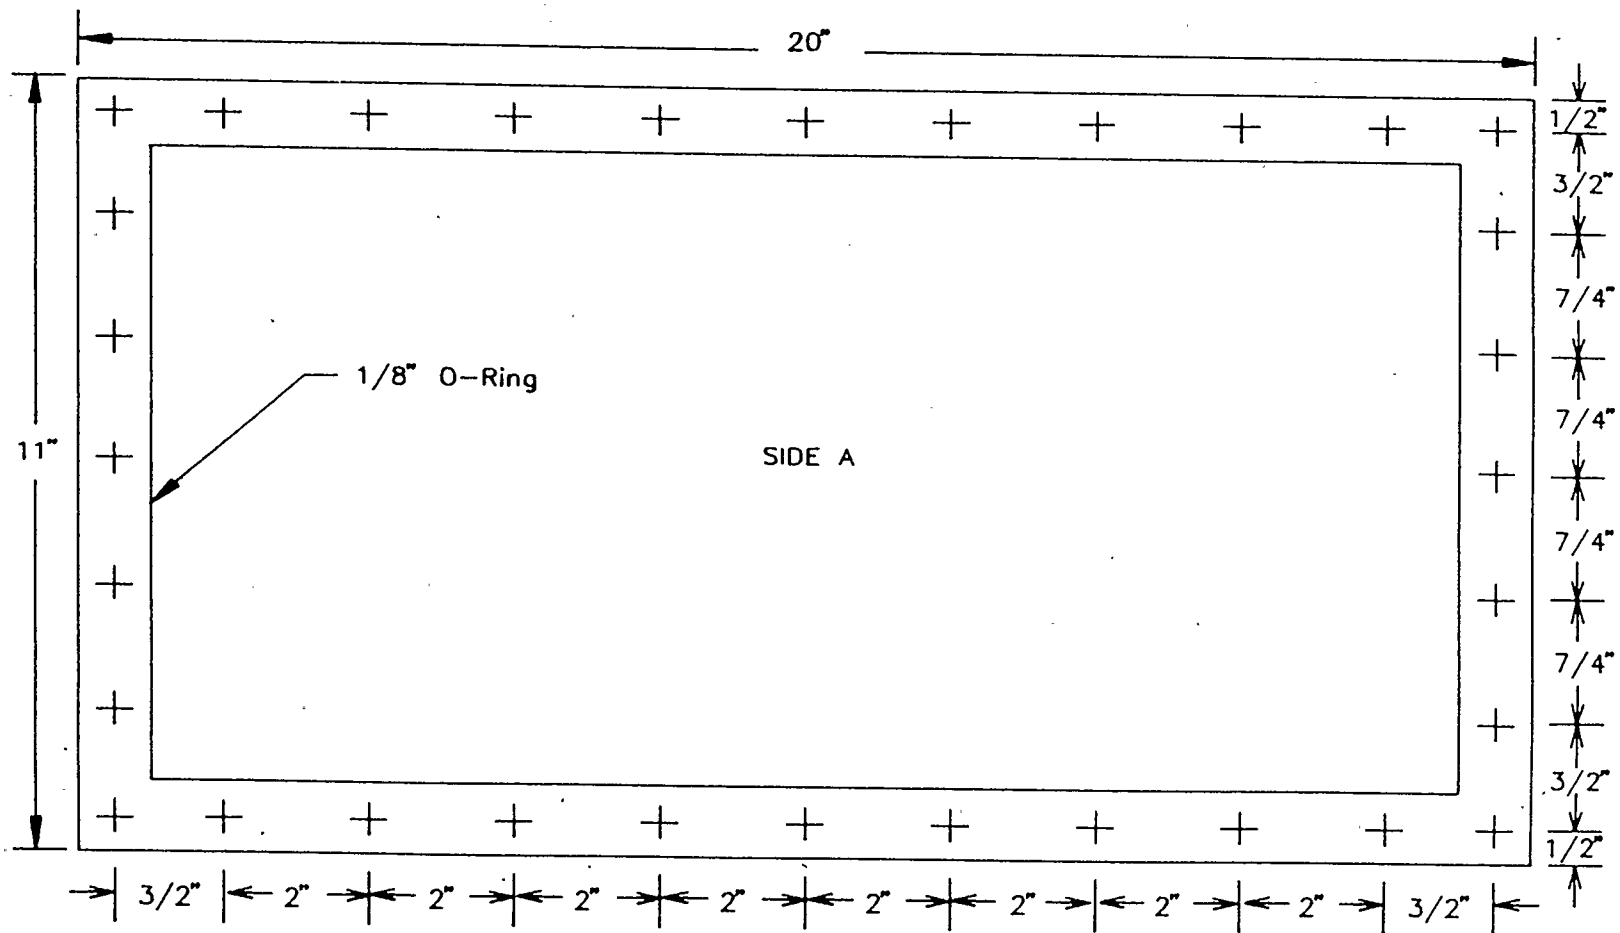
Bolts and O-Ring location and external dimensions of side A
